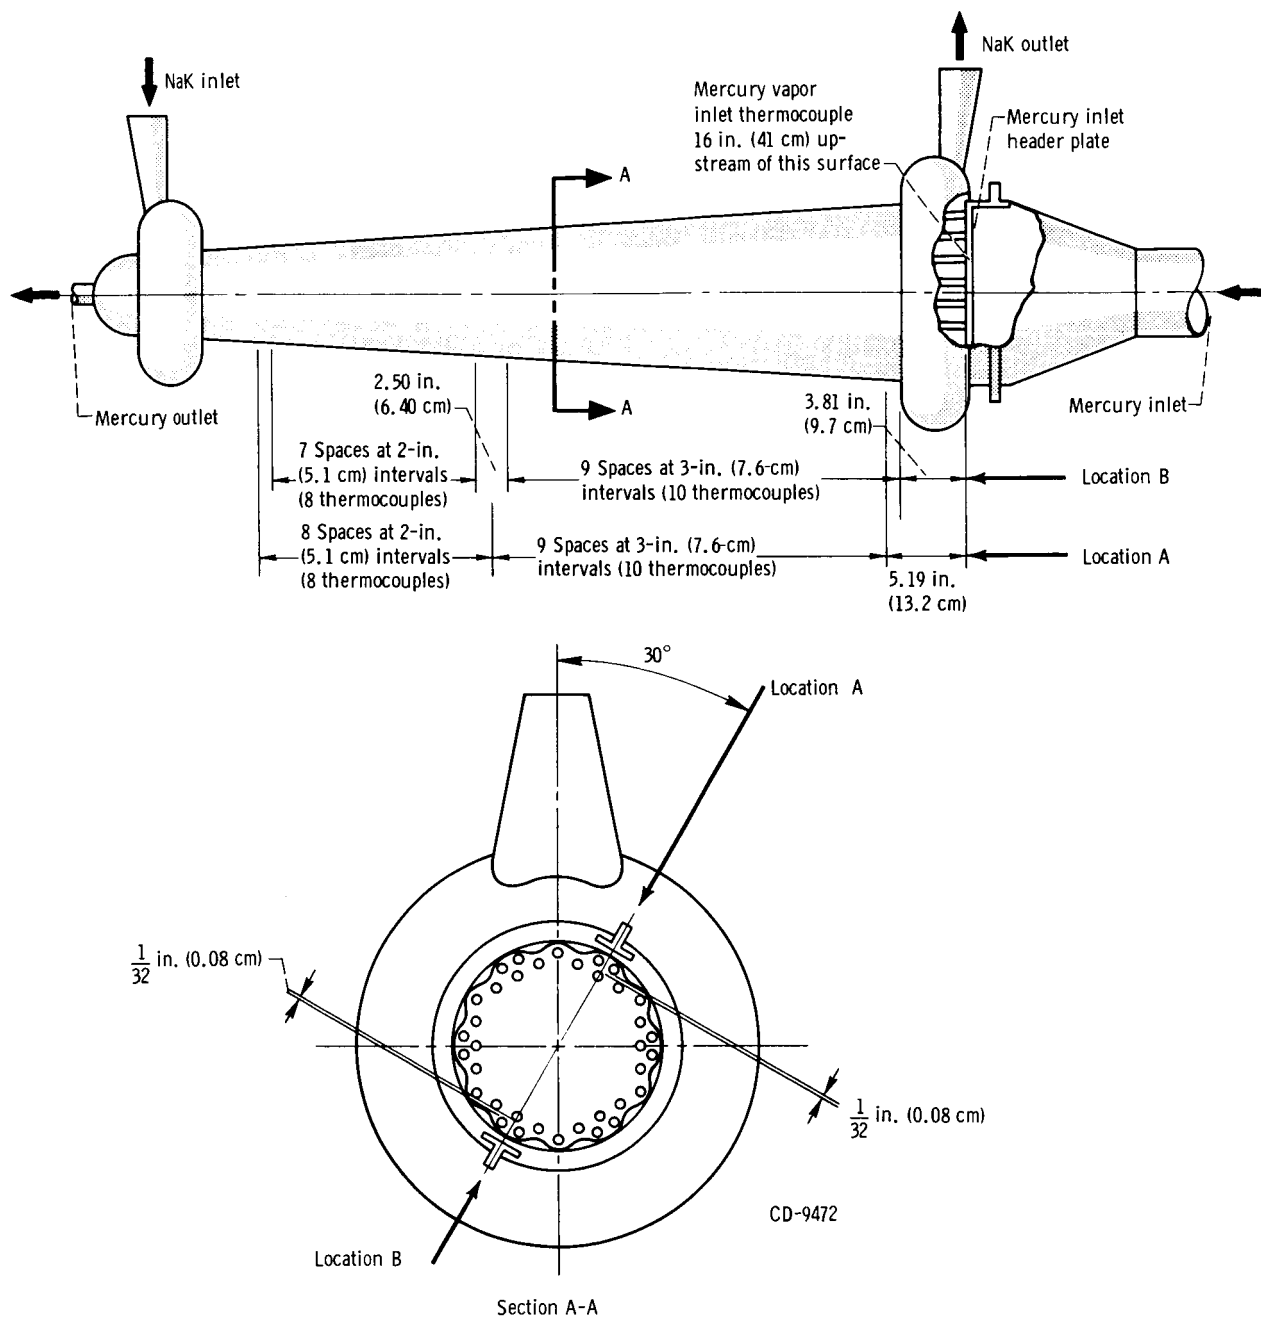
Condenser assembly cutaway showing immersion thermocouple locations.
